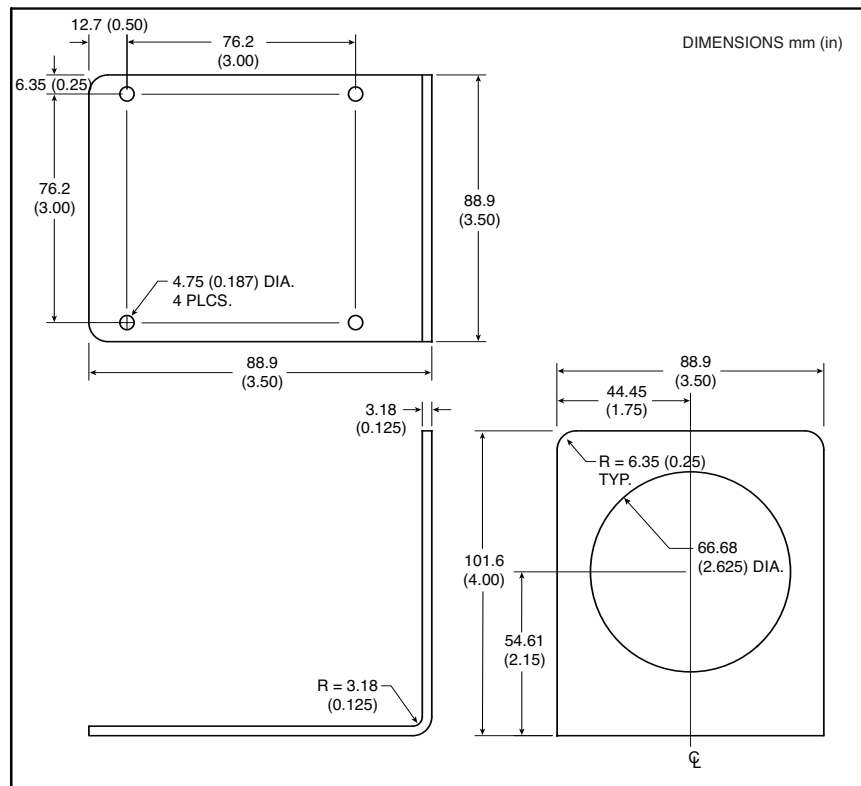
General Dimensions, Mounting Bracket for the Transmitter
